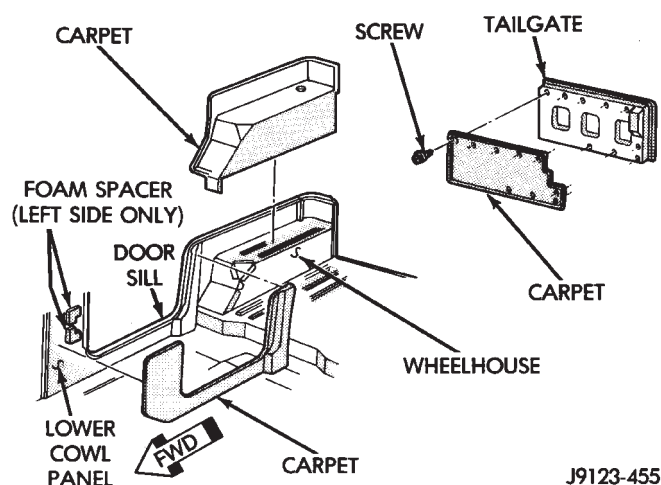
Wheelhouse, Door Sill and Tailgate Carpets
